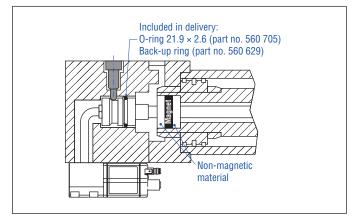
Mounting example of pressure fit flange »S« and sensor electronics with bottom cable entry
